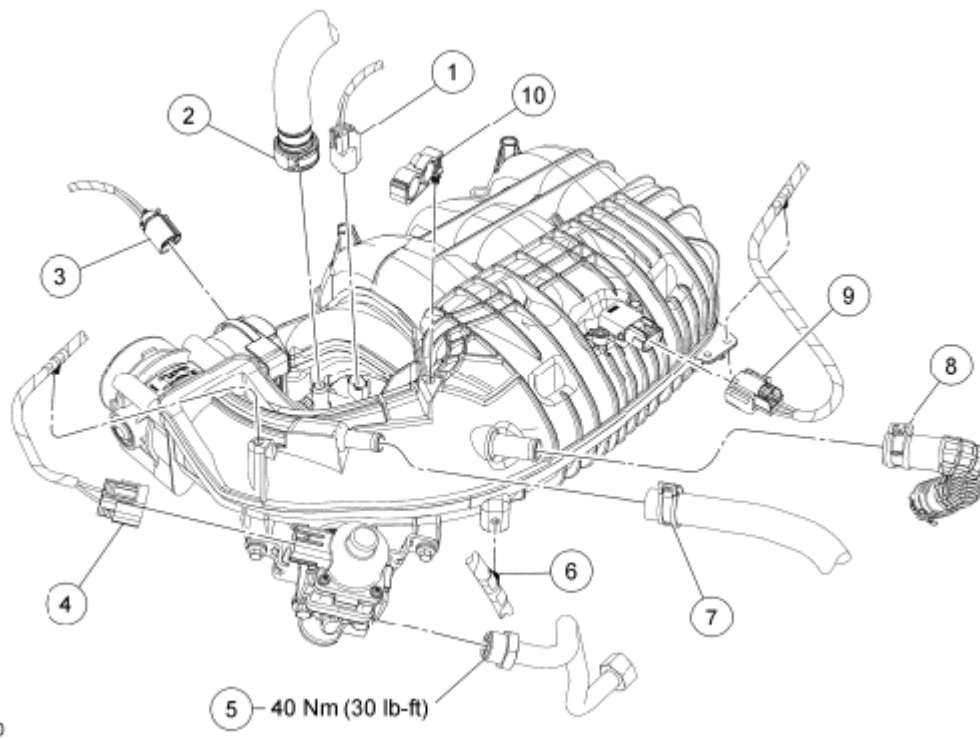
Exploded View Of Upper Intake Manifold (1 Of 2)
